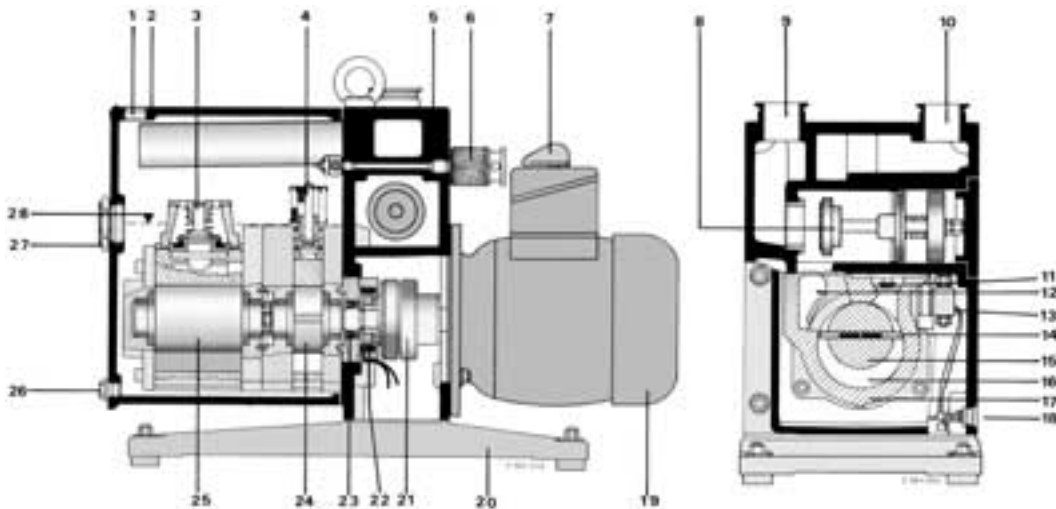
Section through a two-stage rotary vane vacuum pump (Pfeiffer Vacuum GmbH).
